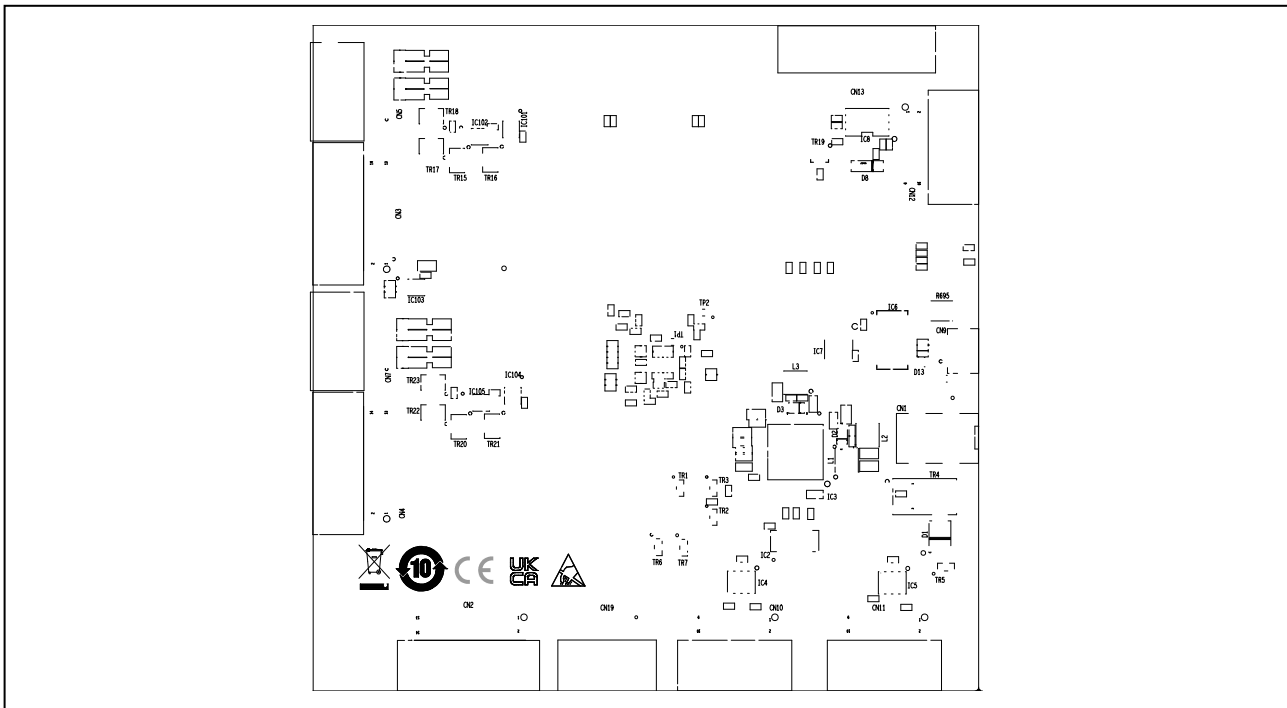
Placement of connectors on the bottom side on board revision D017988\_06\_V01
